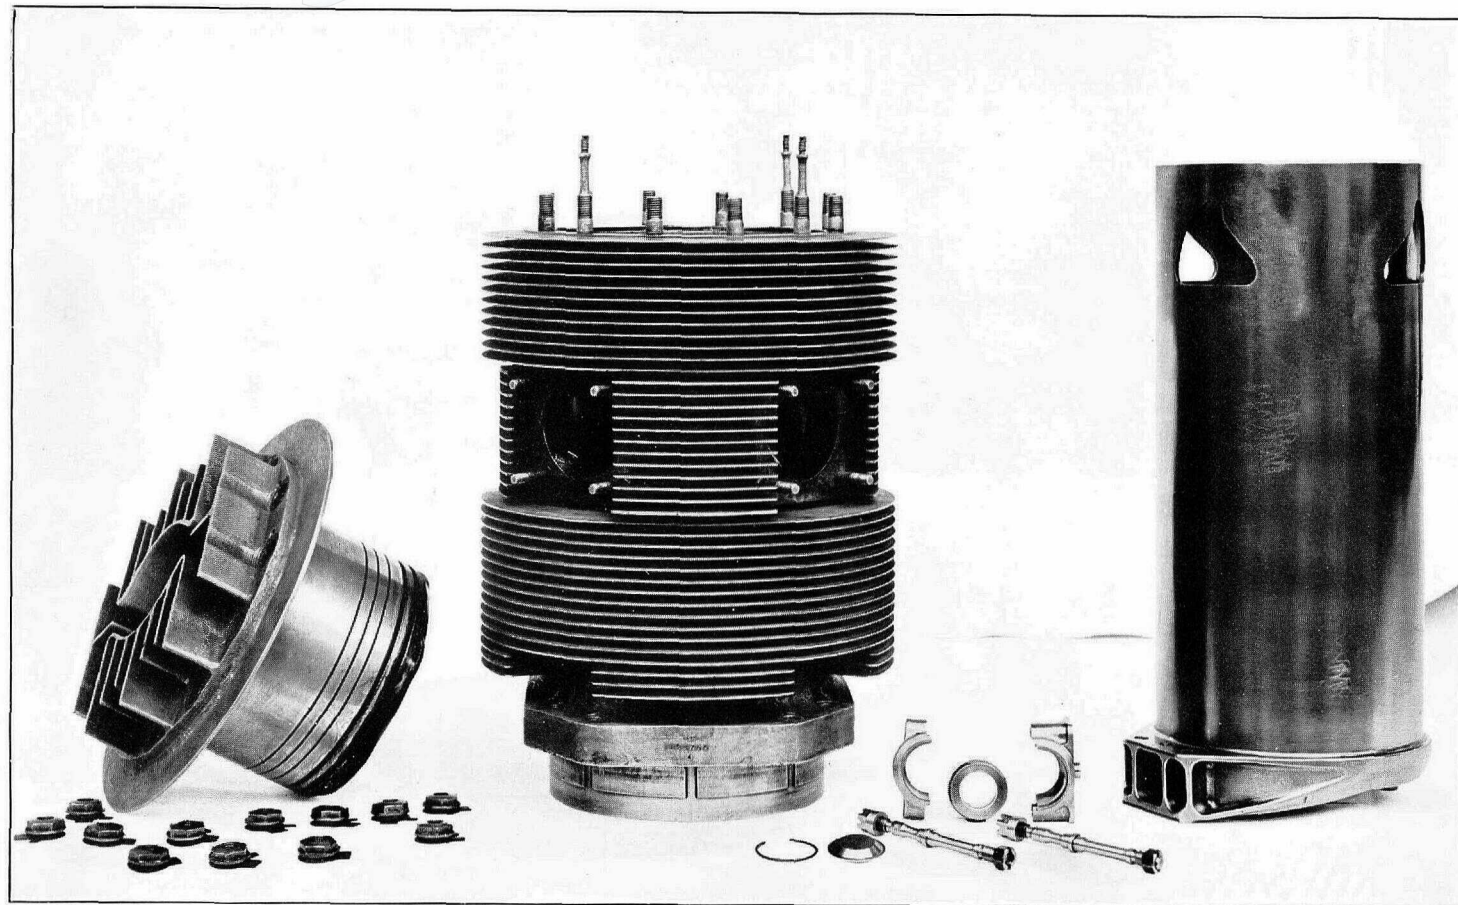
The parts of a sleeve valved cylinder of a radial engine.
